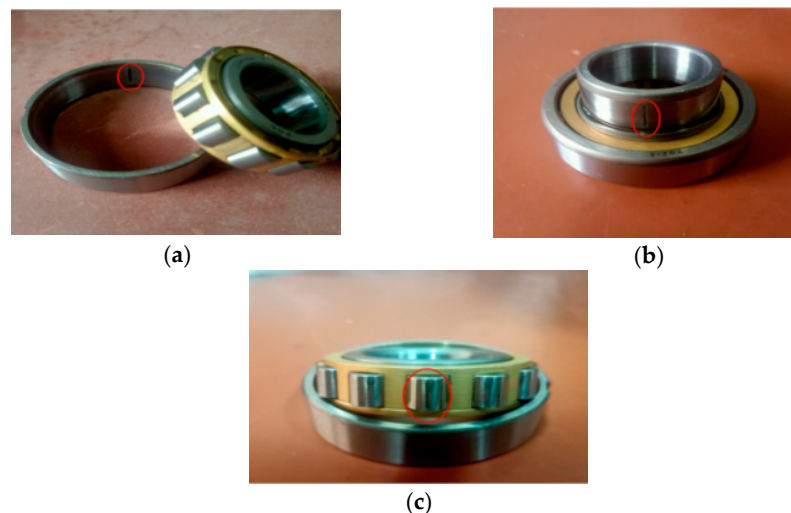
(a) Test bearings outer-ring failure; (b) test bearing inner-ring fault; (c) test bearing rolling-element fault.
